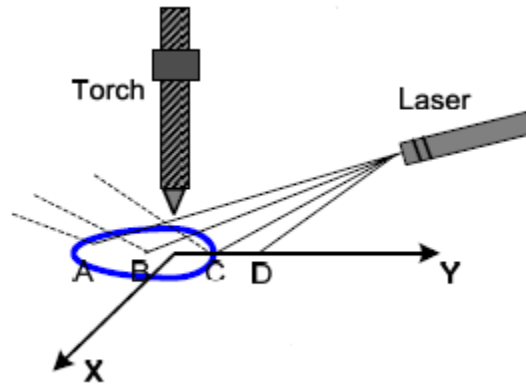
shows that points A, B, and C will be reflected from the weld pool when the pipe is composed of mild steel. Point D is outside the area of the weld pool, so a reflection does not occur.
